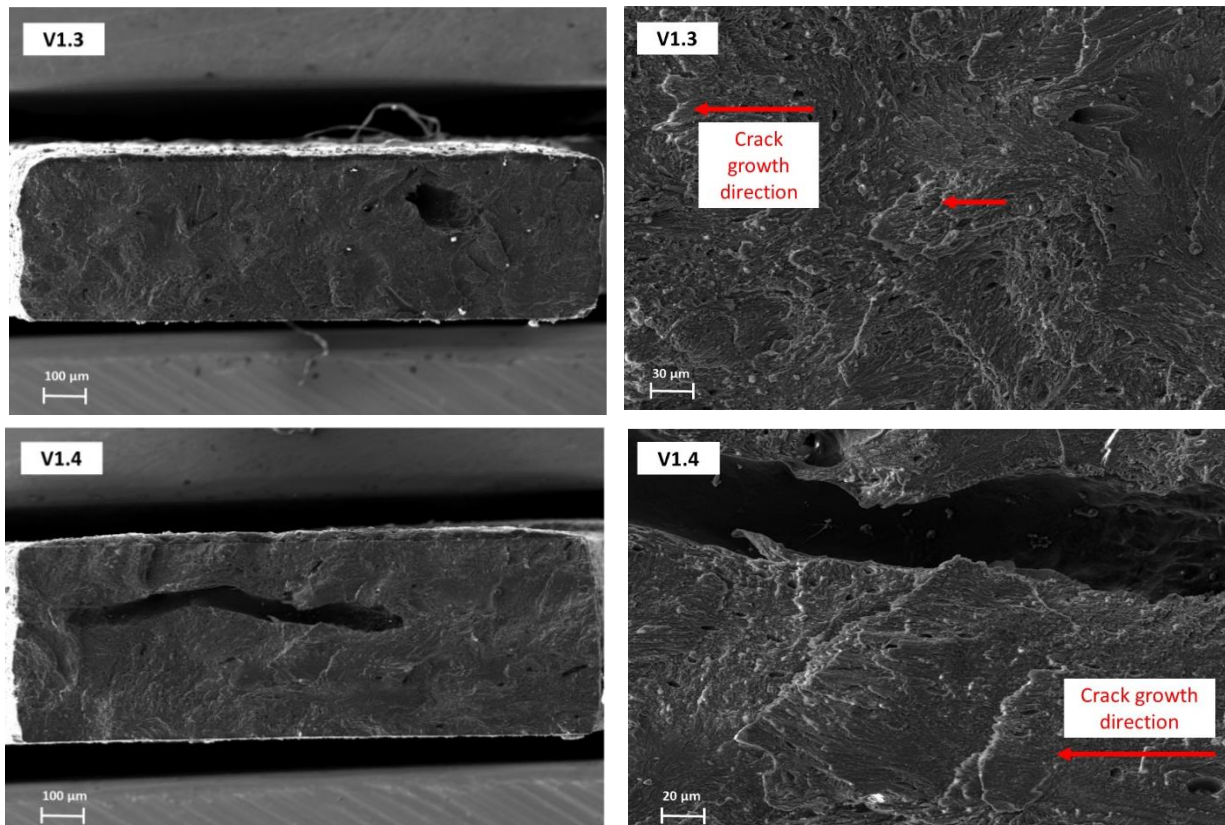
SEM fractographies of V1.3 (top) and V1.4 (bottom) surface fractures. Both samples showed a brittle fracture behavior.
